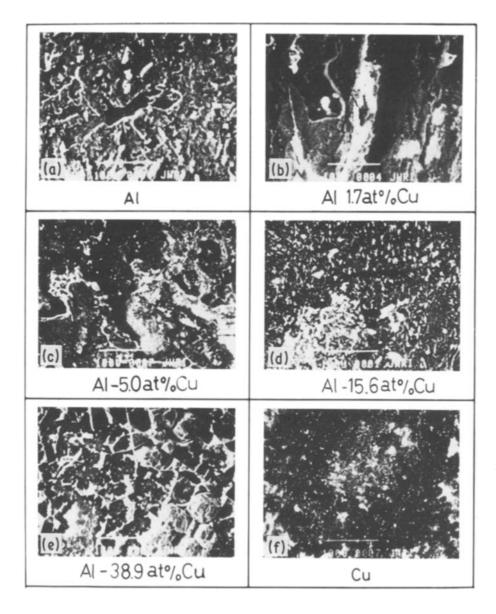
Fracture shear structure of  $Si_3N_4$  joint brazed at 1373 K for 3.6 ksec with Al-Cu alloy filler. (a) Al, (b) Al-1.7 at % Cu, (c) Al-5.0 at % Cu, (d) Al-15.6 at % Cu, (e) Al-38.9 at % Cu, (f) Cu.
